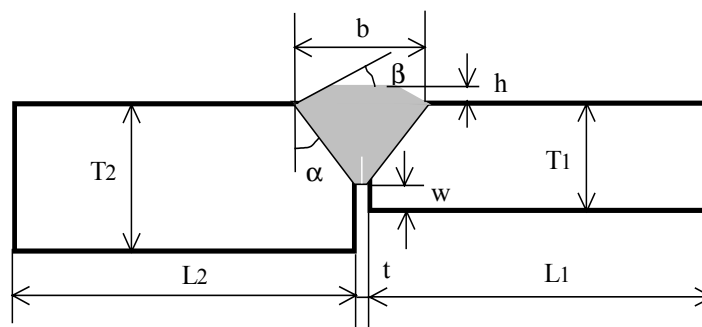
Dimensions of the butt joint welded from one side.
